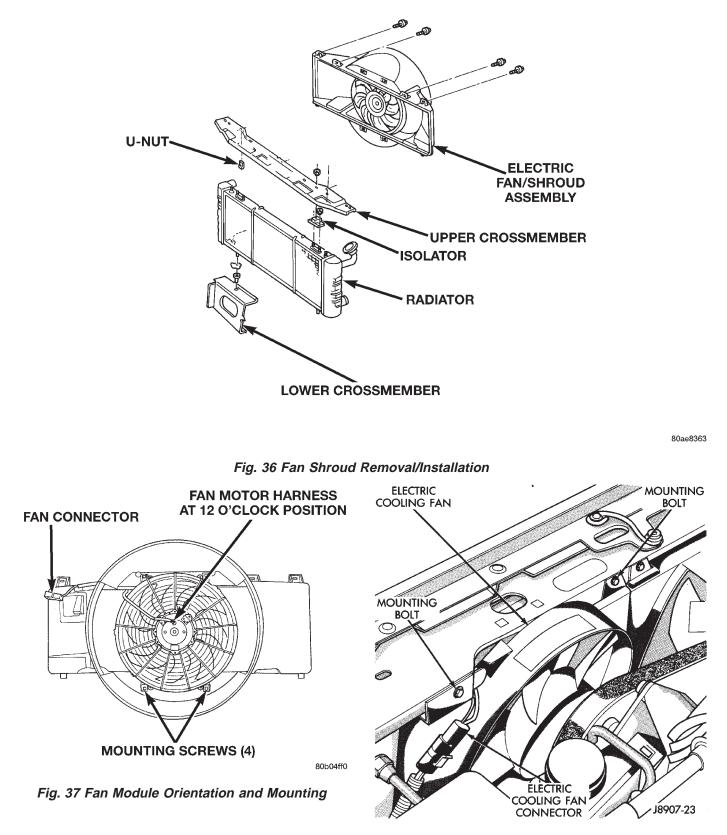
Auxiliary Cooling Fan—Remove/Install— Typical
